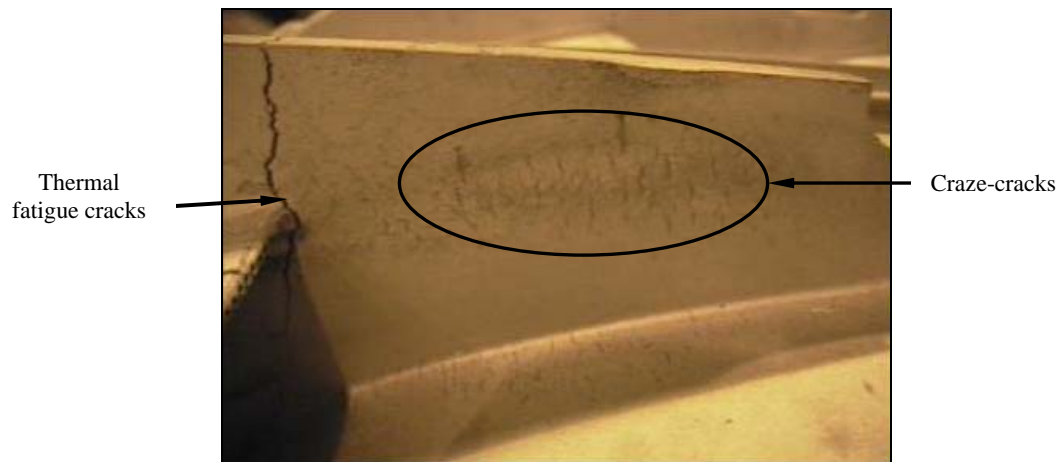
An example of craze-cracks and large individual thermal fatigue cracks on the outer sidewall of a first stage nozzle segment.
